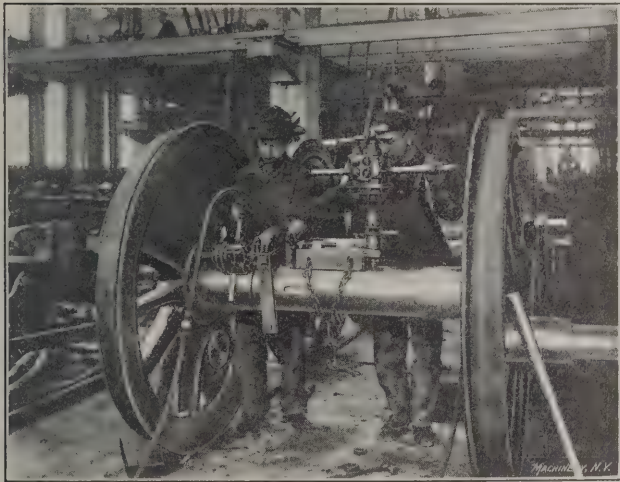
Use of Air Tools Drilling Holes for Hub Liner Studs and Milling Keyways for Eccentrics.
